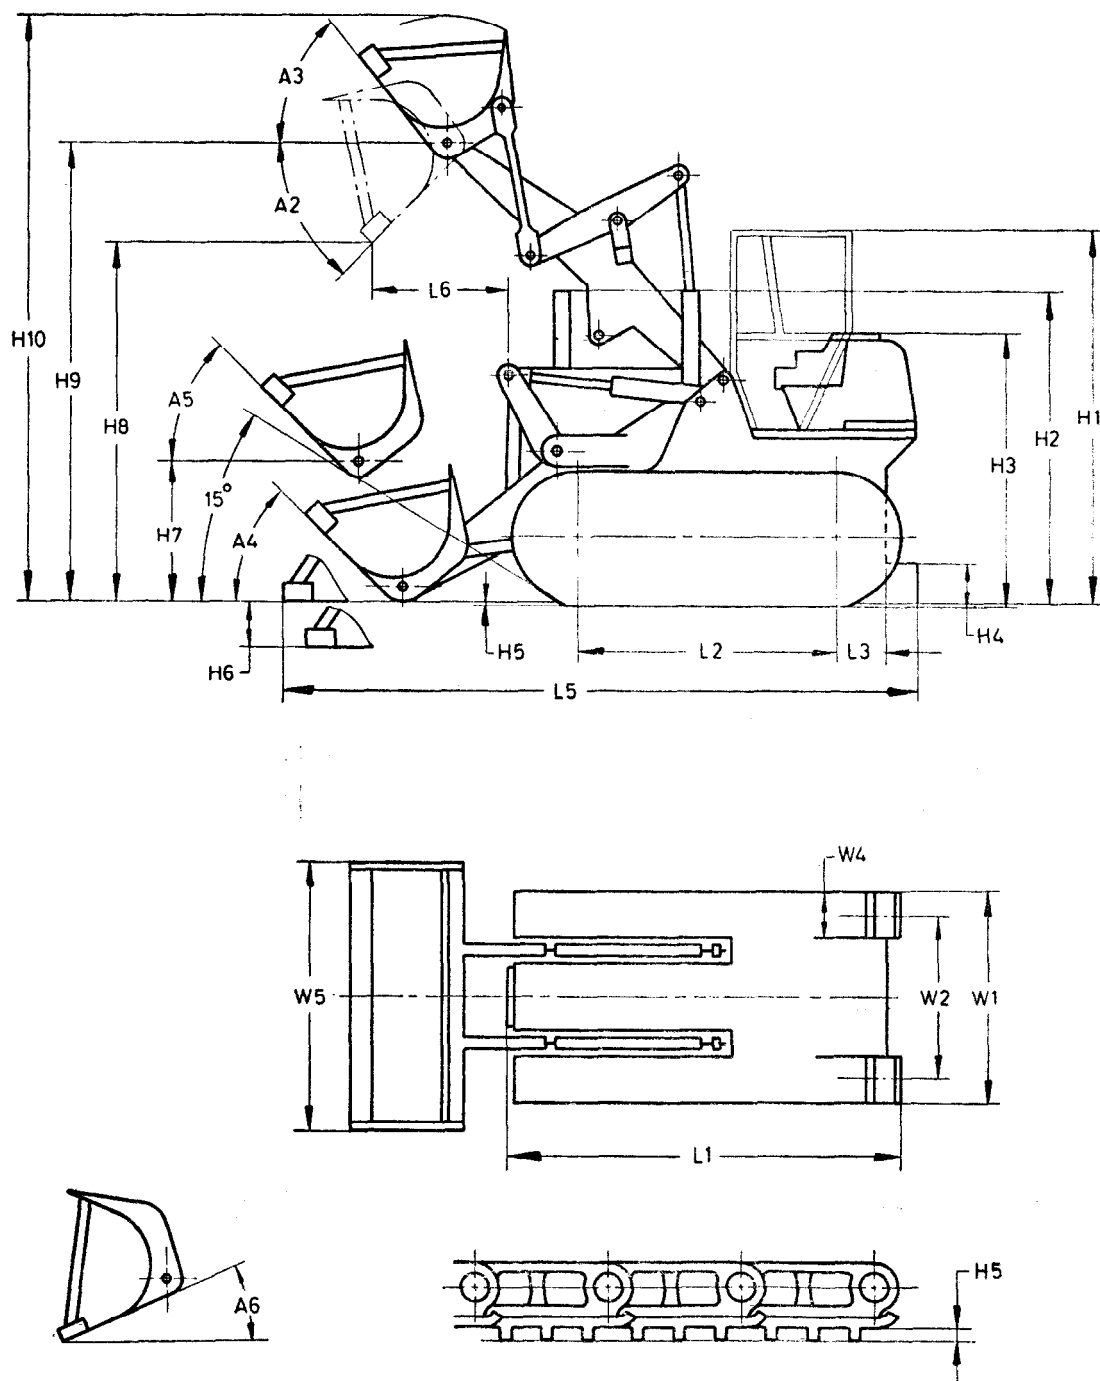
DIMENSIONS OF BASE MACHINE ( CRAWLER LOADER )
